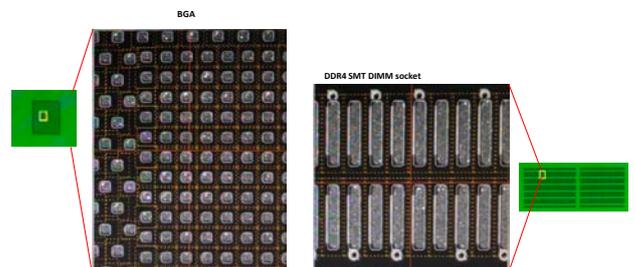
Paste printing inspection SPI of BGA and DDR4
